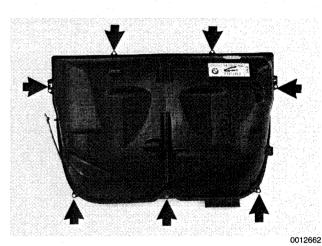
Screws retaining front heater box cover (shown removed) to heater box (arrows).
